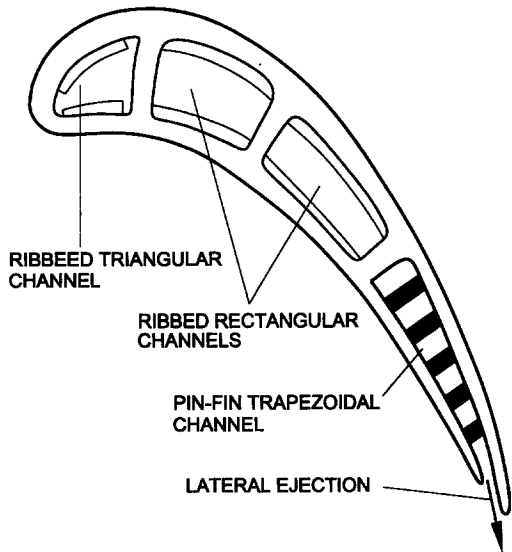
Cross-sectional view of the modern internally cooled turbine blade.
